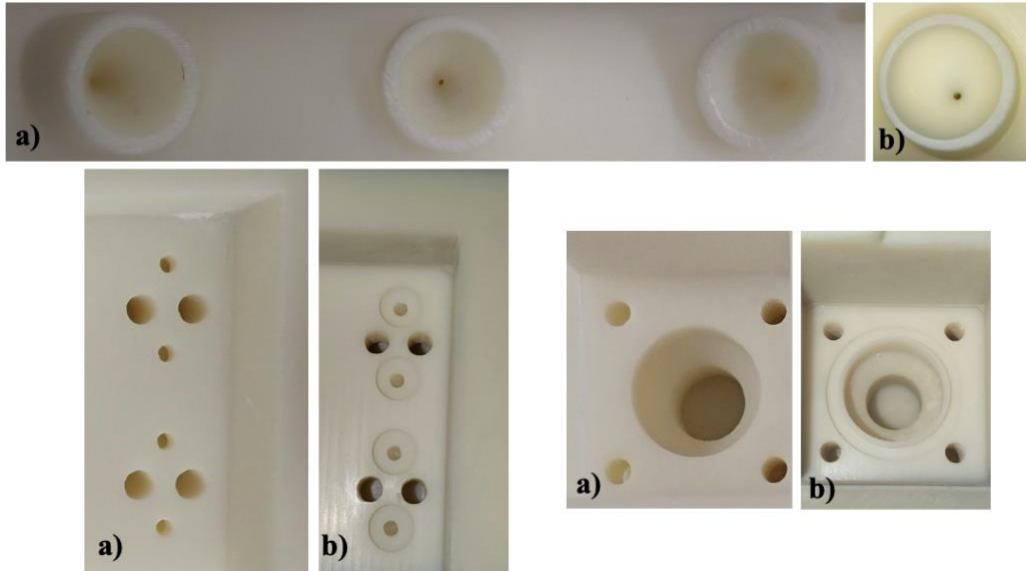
Printed structure a) pre- and b) post-machined nozzles and O-ring grooves.
